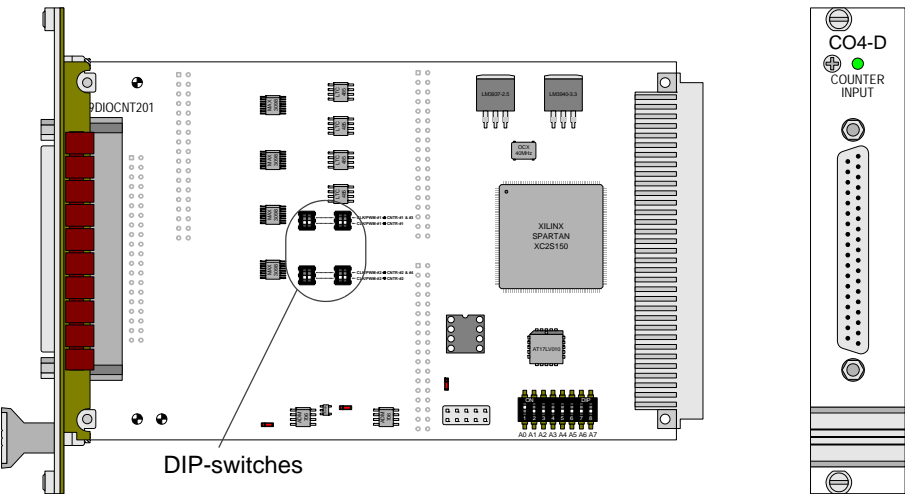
Pro-CO4-D REVA: Board and front panel
